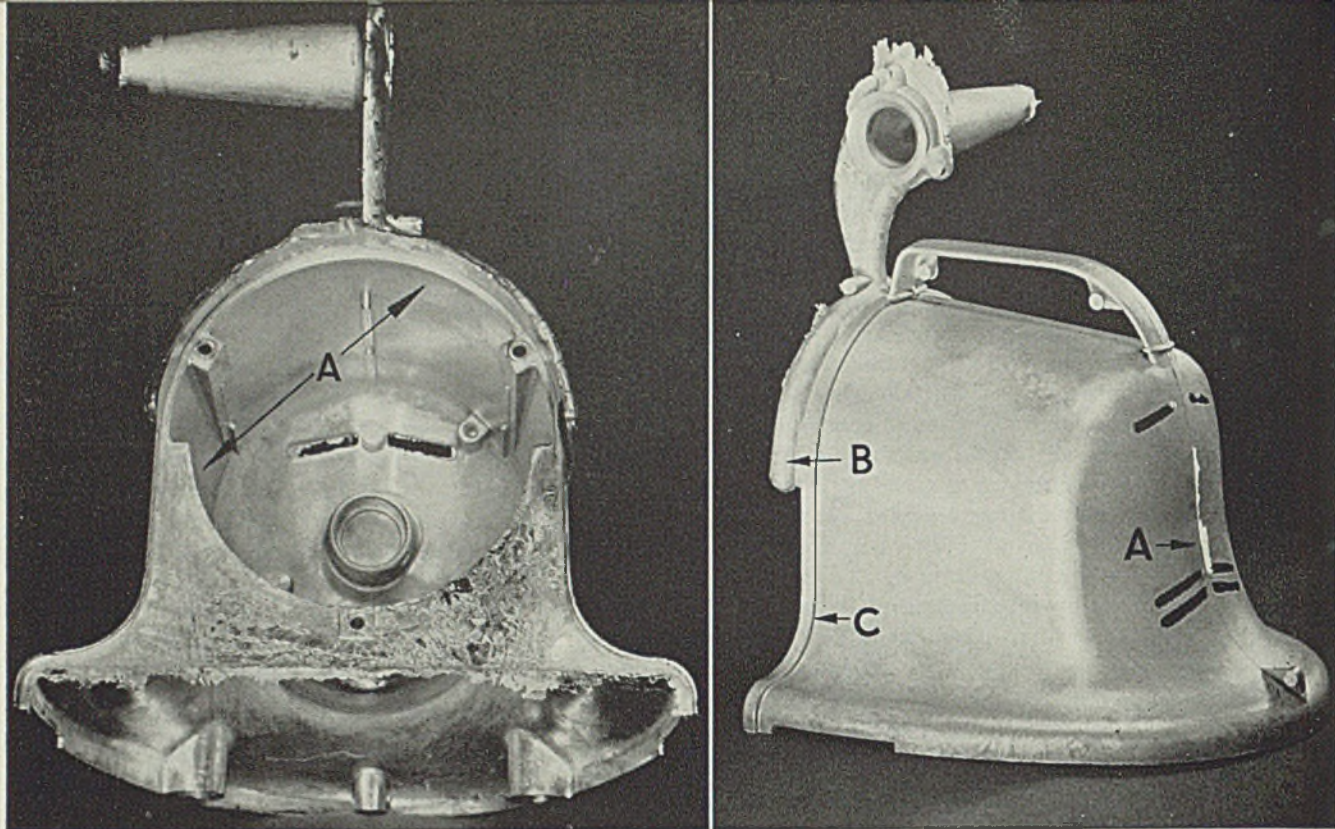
, left, shows back view of typical difficult diecasting job handled easily on the all-welded diecaster. Note flash at bottom of near surface is so thin as to have holes all through it. Fig. 6, right, is same diecasting viewed from front. Flash at A is less than 0.001-inch thick. Parting line above and below A has no flash whatever
